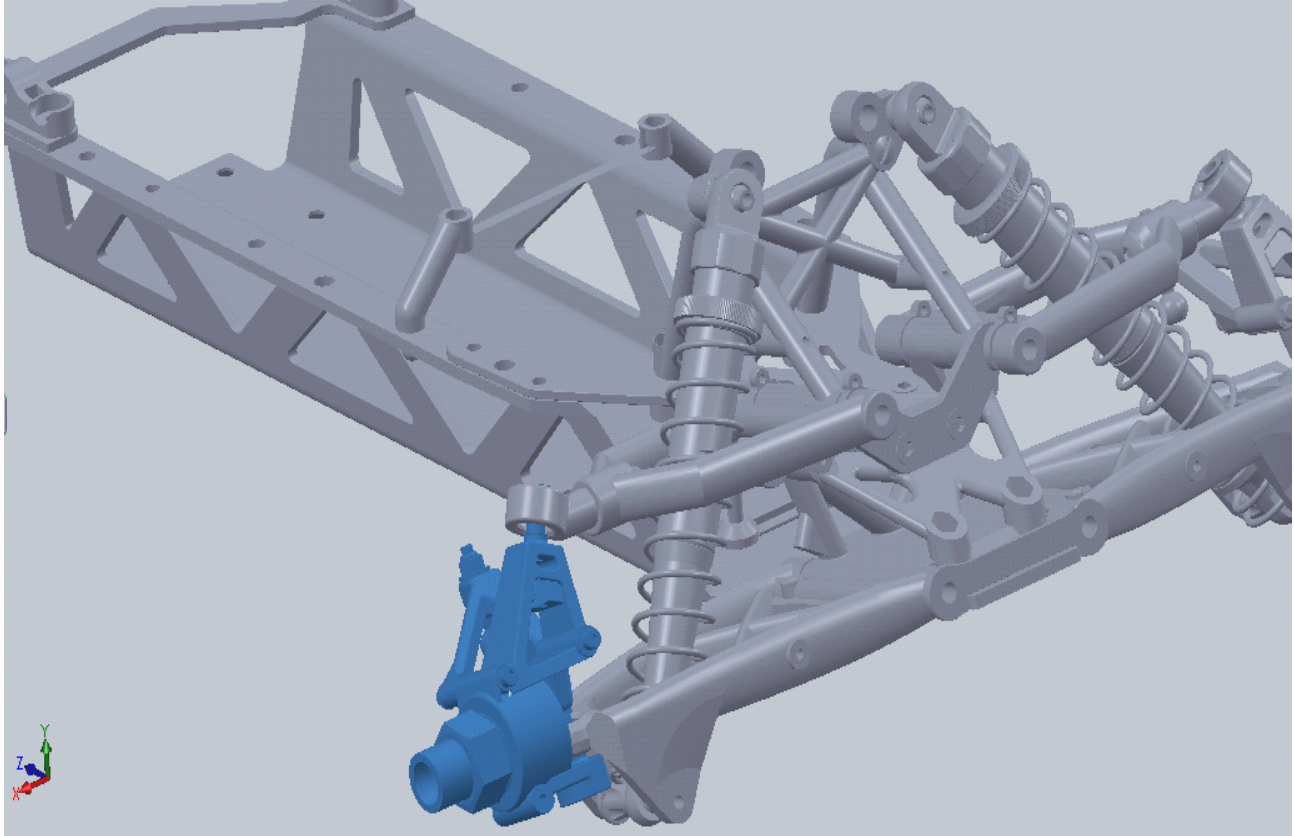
5. Front right hub assembly shown in blue as part of the complete vehicle assembly.
